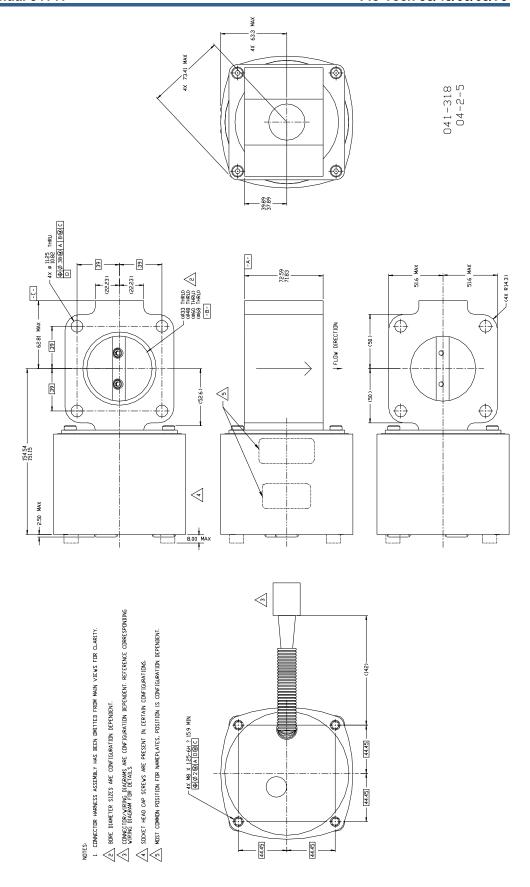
Flo-Tech Outline Drawing (No Flange Mounting)
